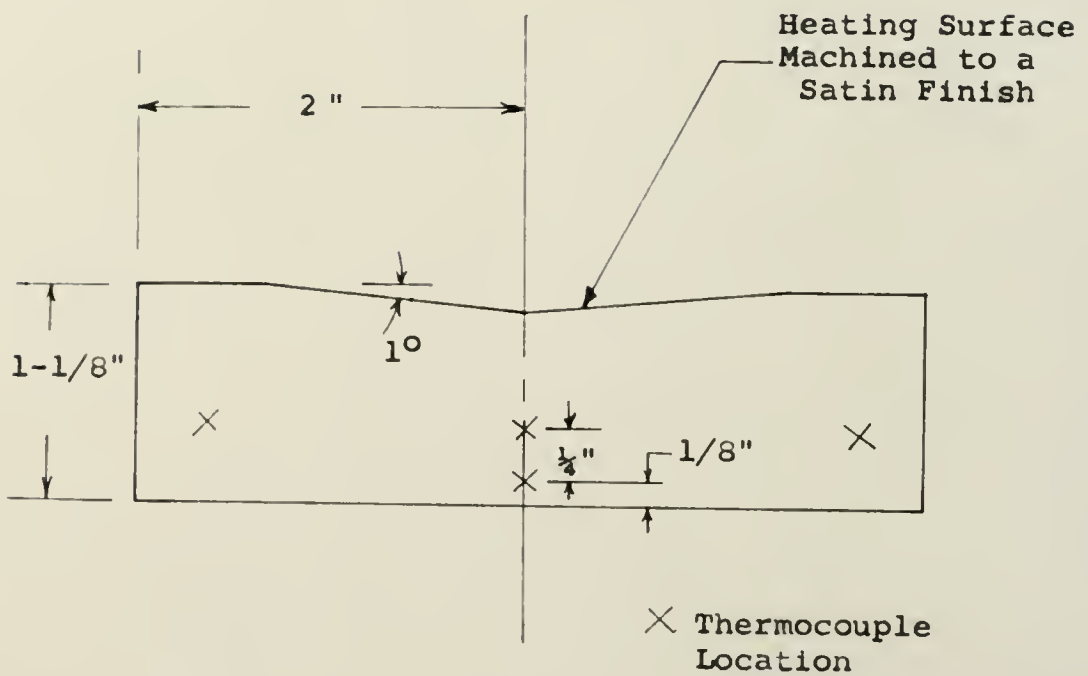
Schematic Cross Section of Test Plate with a 1° Conical Heating Surface.
